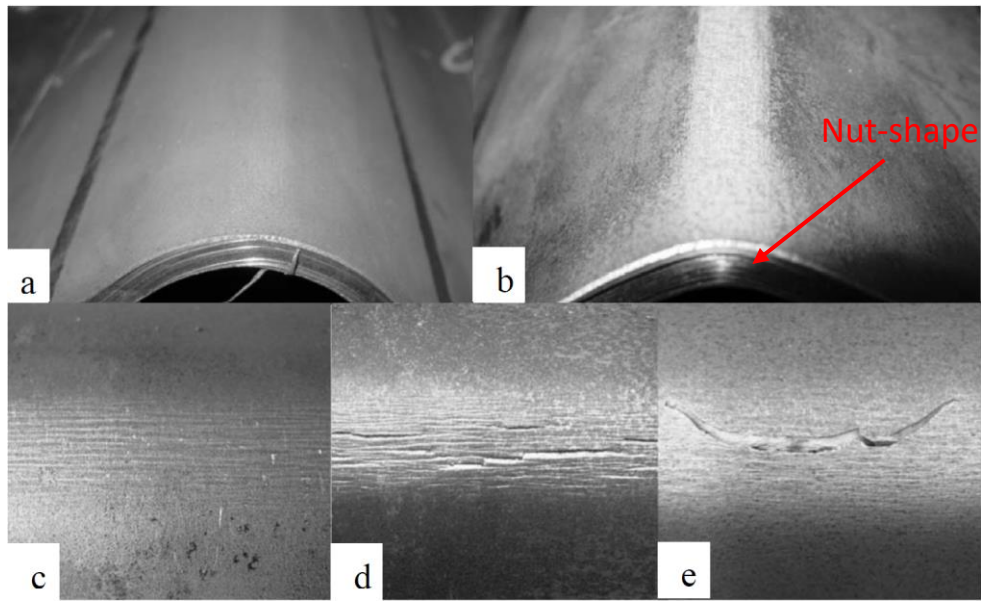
Visual inspection method for identifying bending failures, a, Flawless bend, b, nut-shape, c, surface waviness, d, surface cracks and e, cracks coalesce [63].
